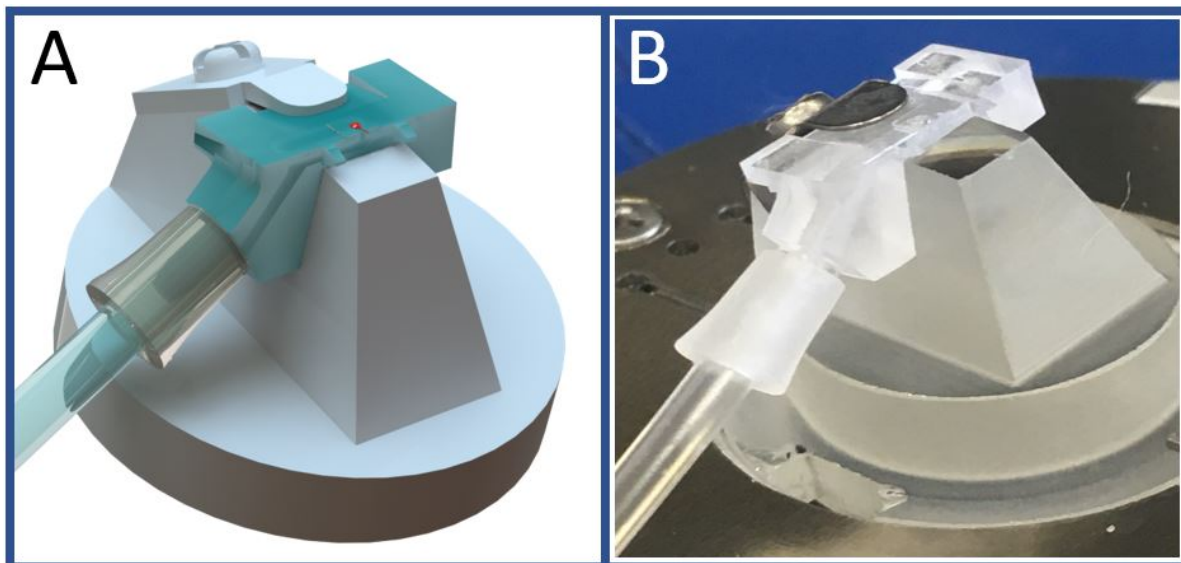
CAD render of DLP print assembly and real assembly. Shows an assembly of the tubing, securing element, microfluidic interface and AFM holder. A) Render made in Solidworks, B) Printed microfluidic interface assembled on AFM holder connected to tubing.
